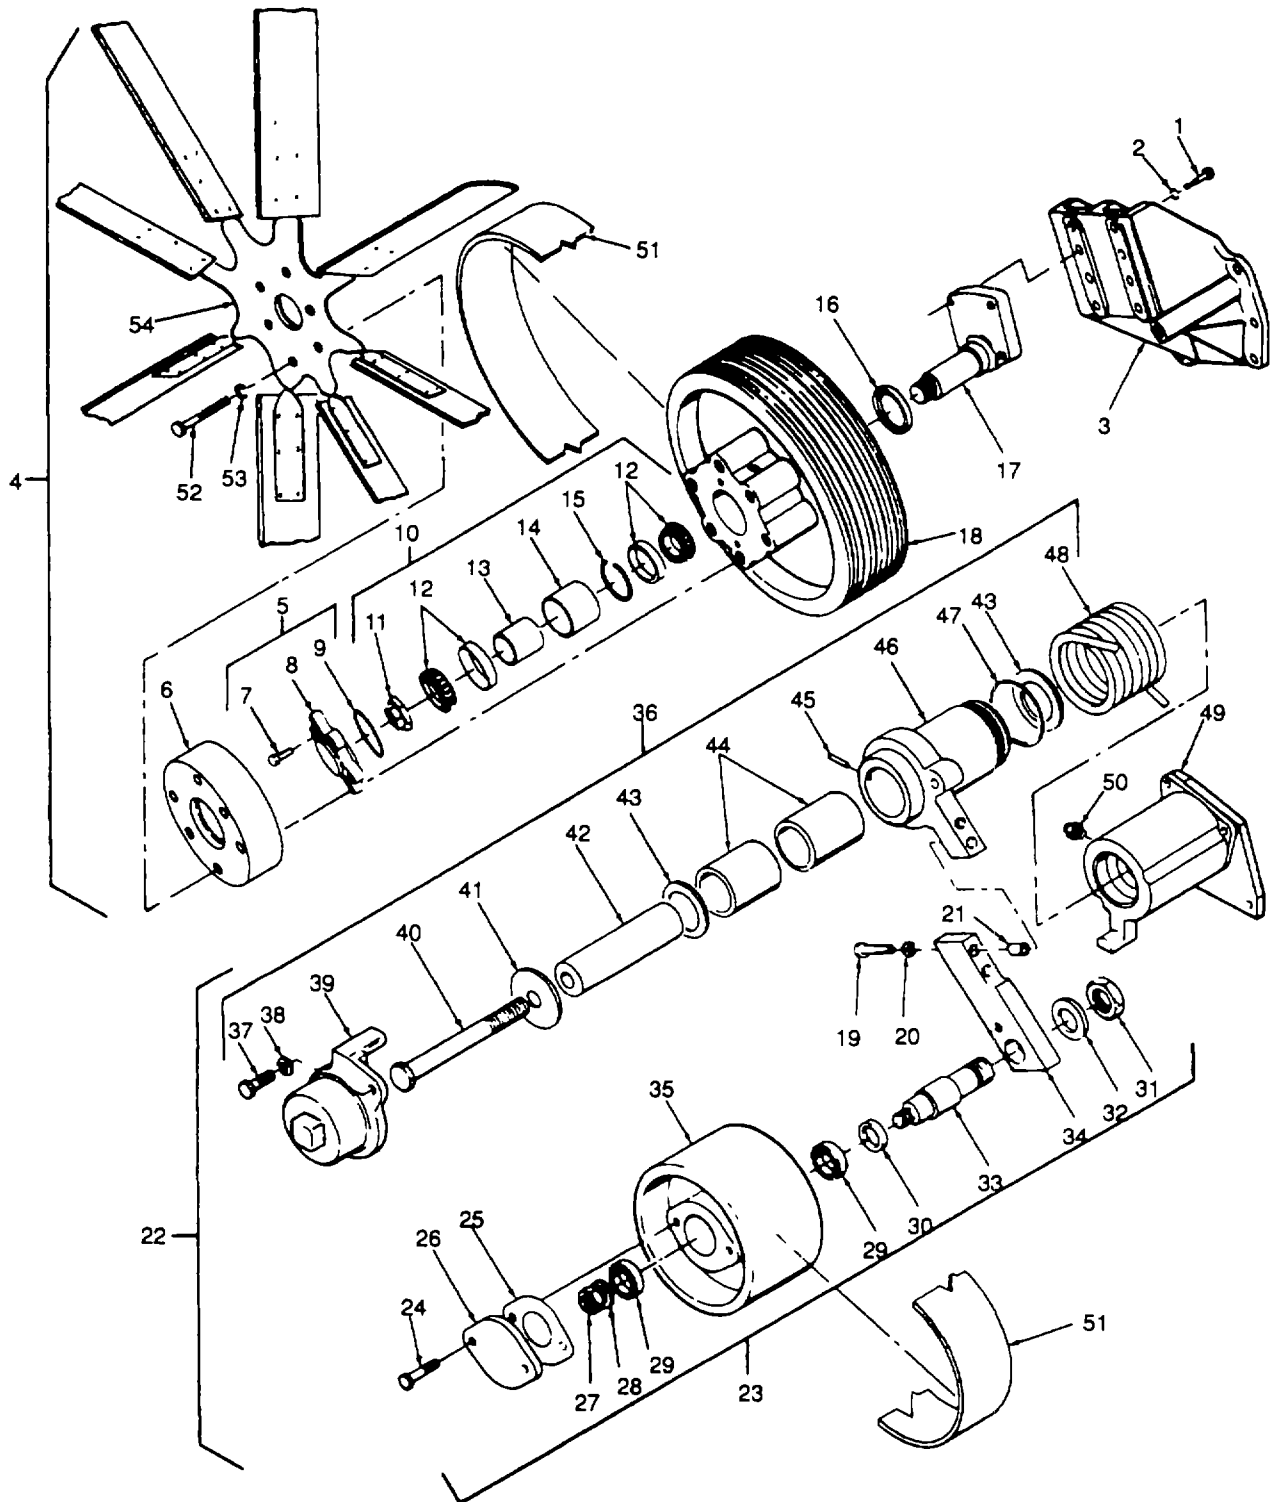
Fan Hub and Related Parts (Sheet 1 of 2)
